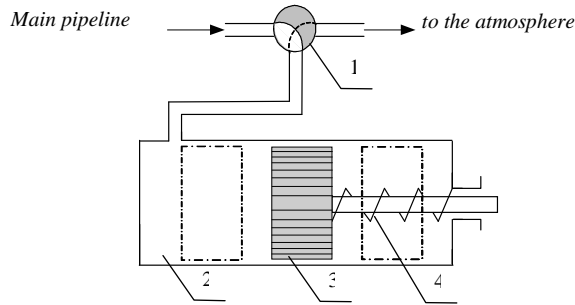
One way operation pneumatic drive scheme: 1) – valve, 2) - pneumatic cylinder, 3) – piston, 4) - spring
